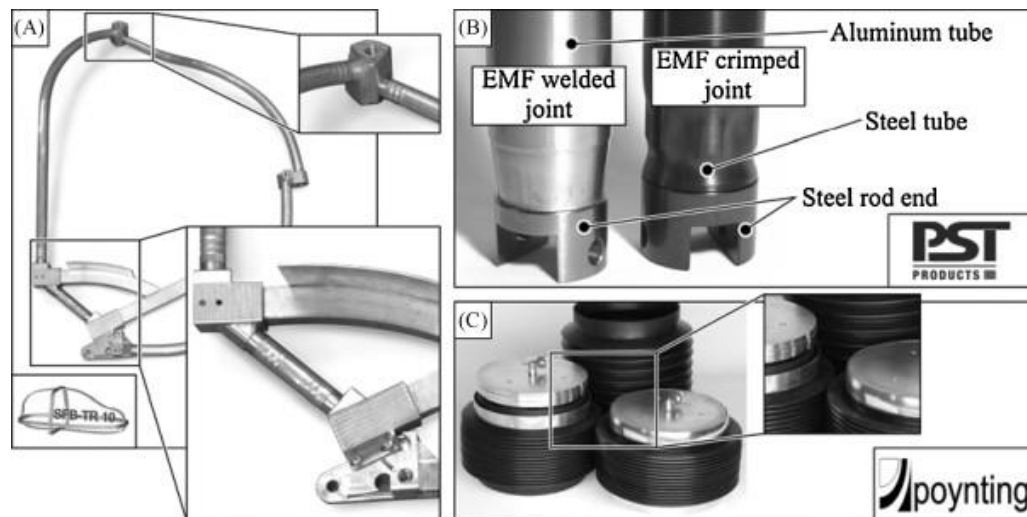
Examples of applications for EMJ joints. (a) Lightweight frame structure, (b) driveshaft with a welded (left) and a crimped (right) joint manufactured and (c) oil expansion vessel sealed by a compressed aluminium ring [38]
